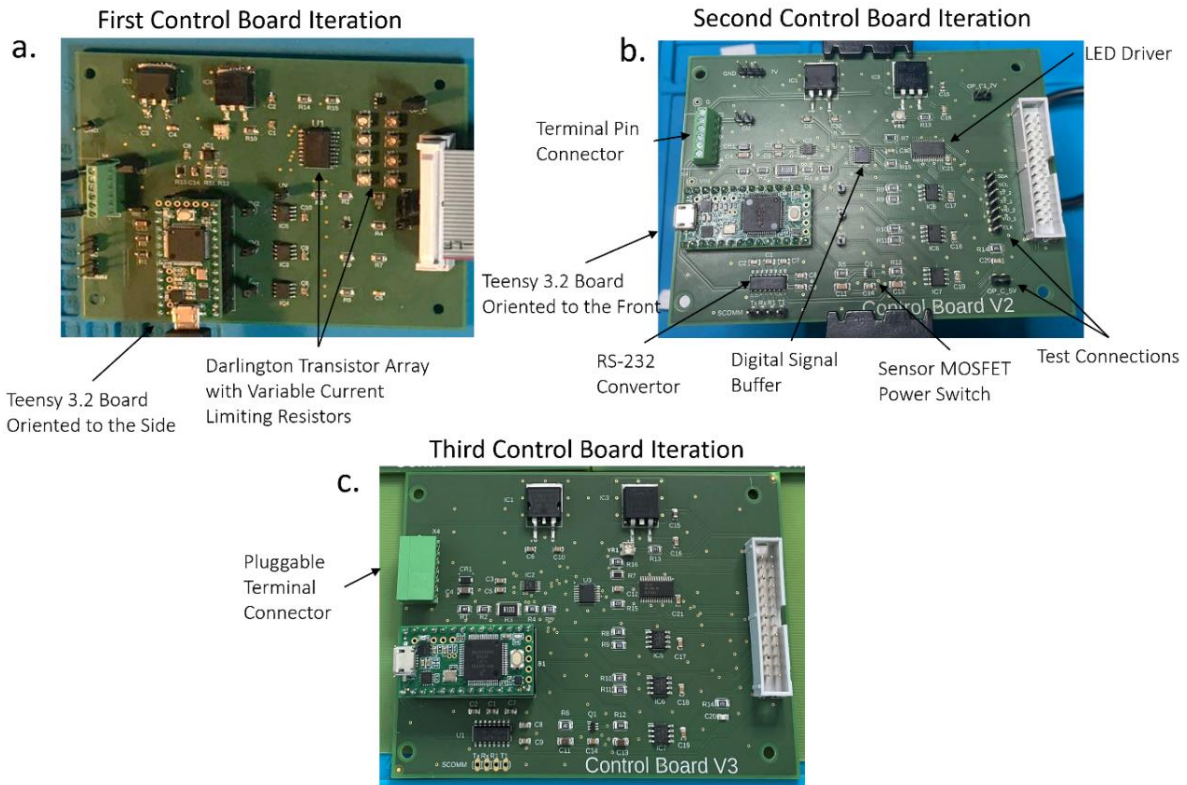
Iterations of the assembled control boards designs with changes made labelled. (a) Assembled PCB of first iteration control board. (b) Assembled PCB of second iteration control board. (b) Assembled PCB of third and final iteration of the control board design.
